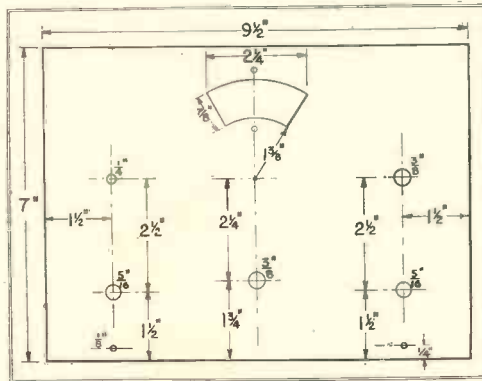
DETAILS OF DIMENSIONS FOR DRILLING PANEL.
